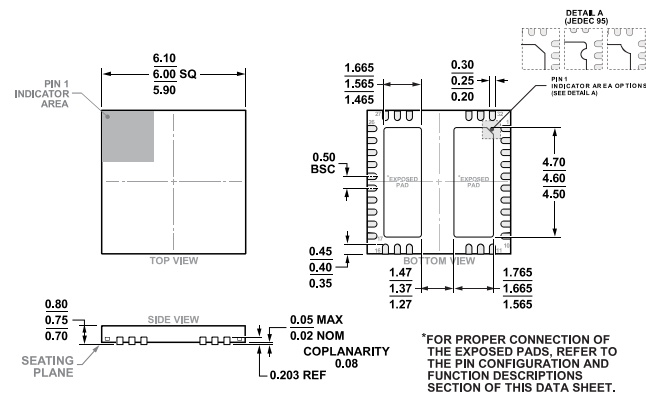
32-Lead Lead Frame Chip Scale Package [LFCSP] 6 mm x 6 mm Body and 0.75 mm Package Height (CP-32-32)
